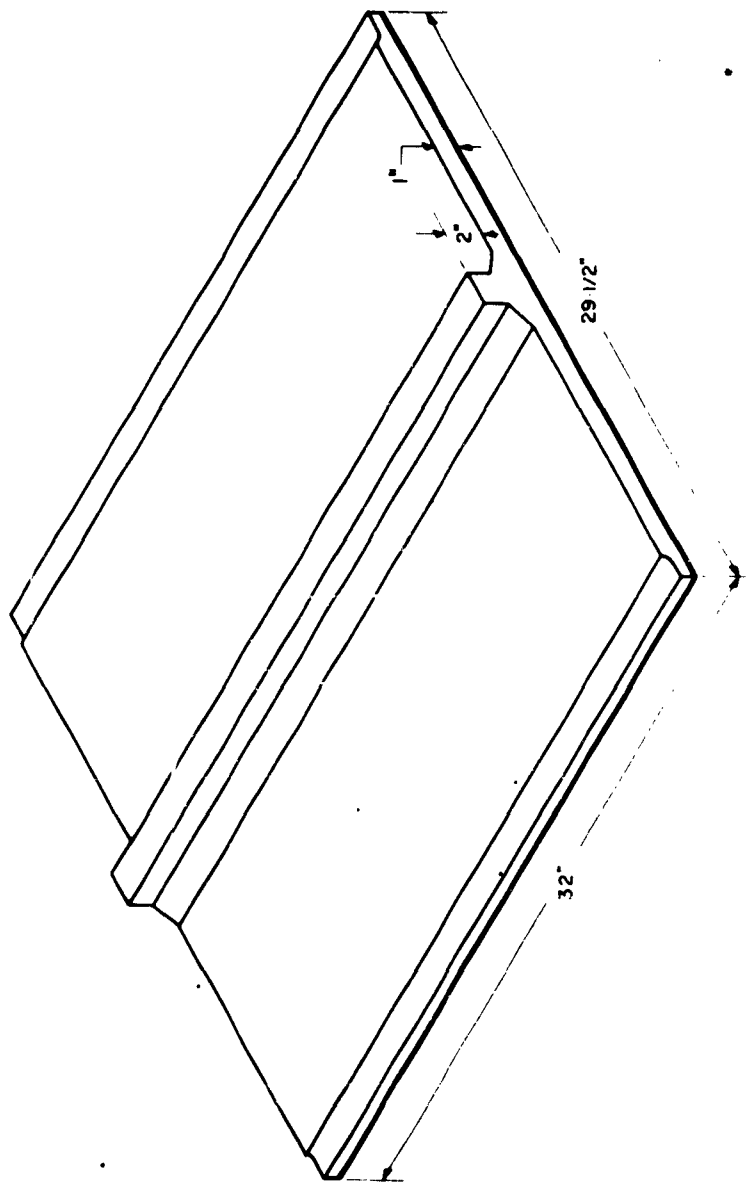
Large Scale Plate Type Fatigue Specimen
